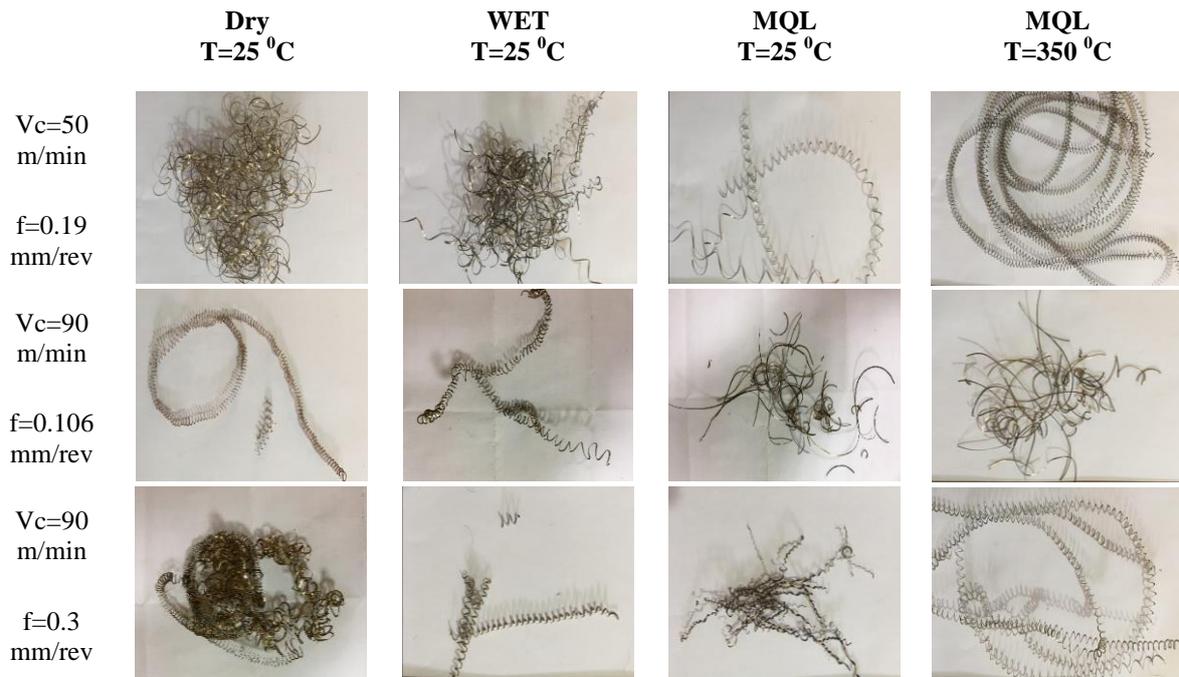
Chips obtained from machined specimens under different machining parameters and conditions
